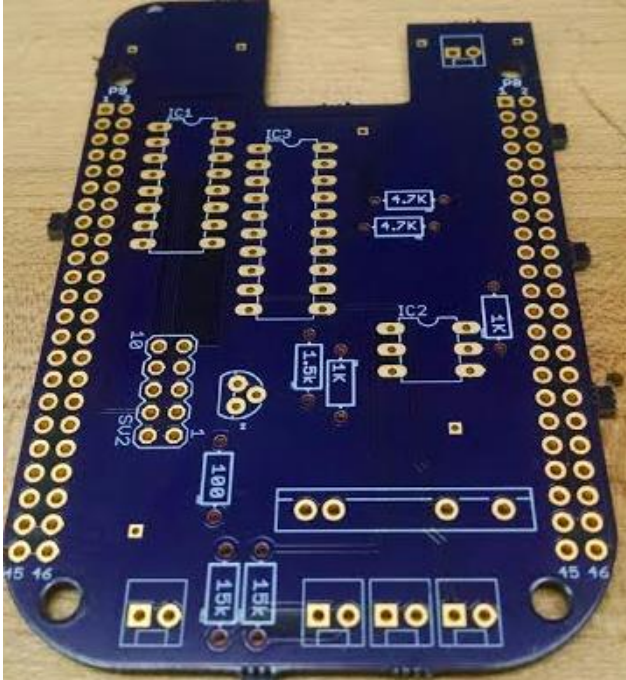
The final PCB layout design received from OshPark. The board consist of 4 molex connectors to serve as inputs for; 3.3V line, I/O for the magnetron relay, I/O for light relay, and I/O for the door switch.
